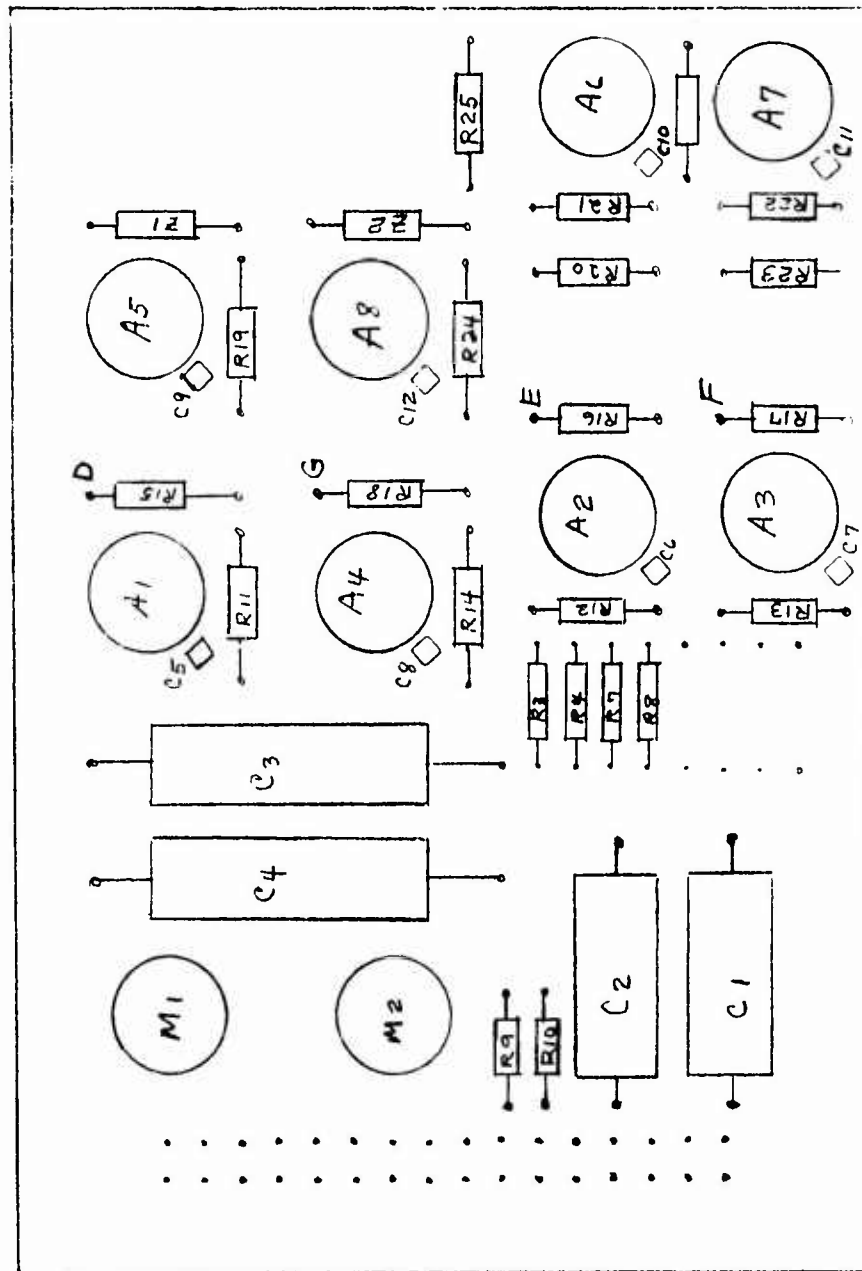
Board No. 23 Layout 2Ω Ref Gen
